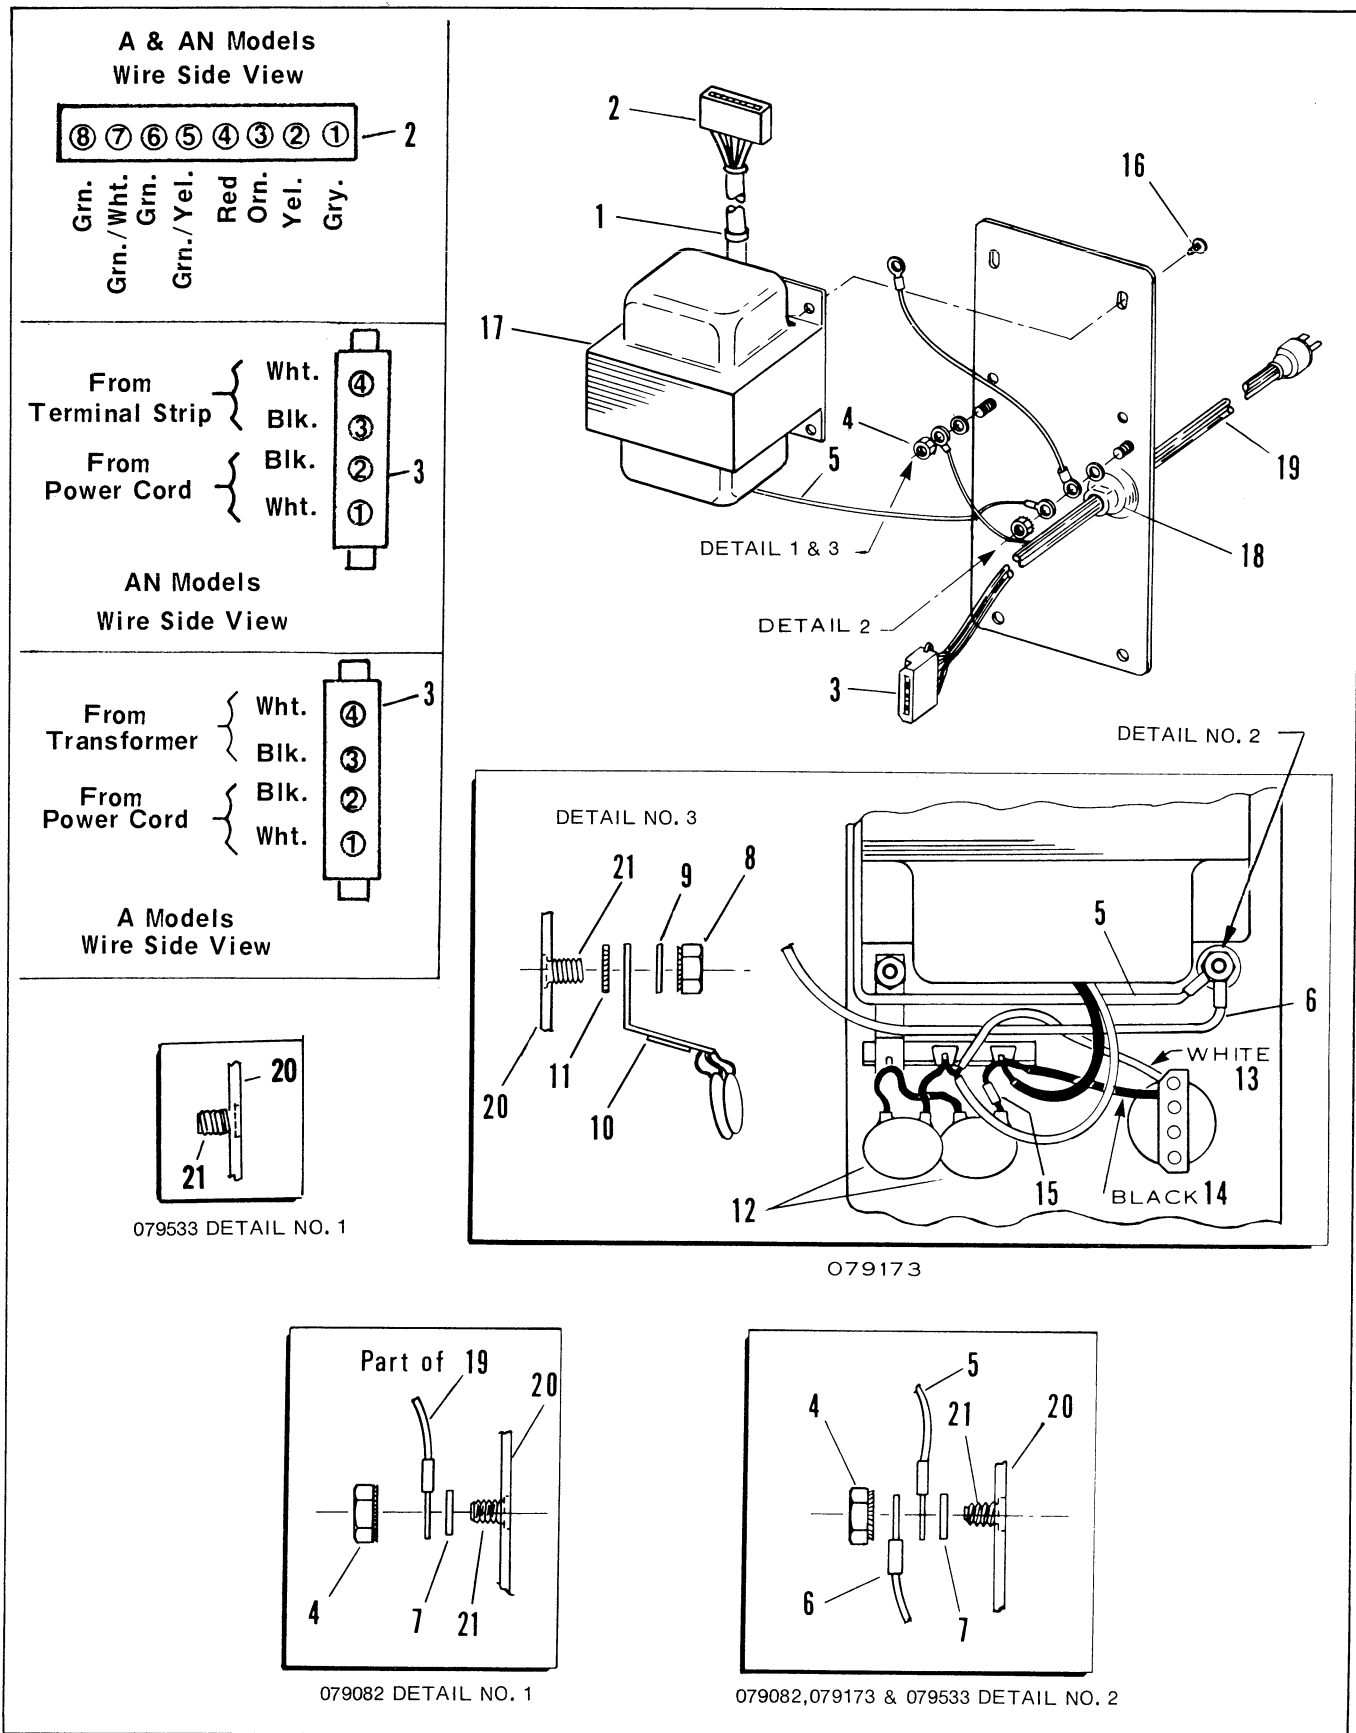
Transformer and Wiring Plate Assembly ("A" and "AN" Models Only)
